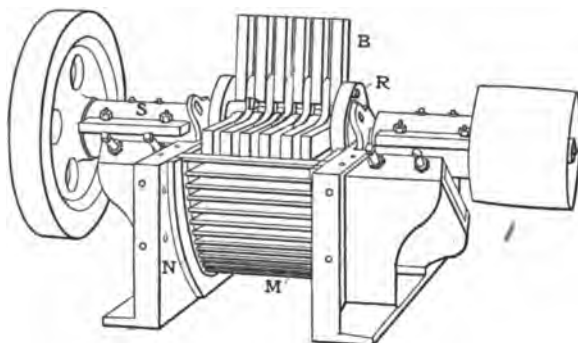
SWING-HAMMER PULVERIZER. HOUSING REMOVED.
